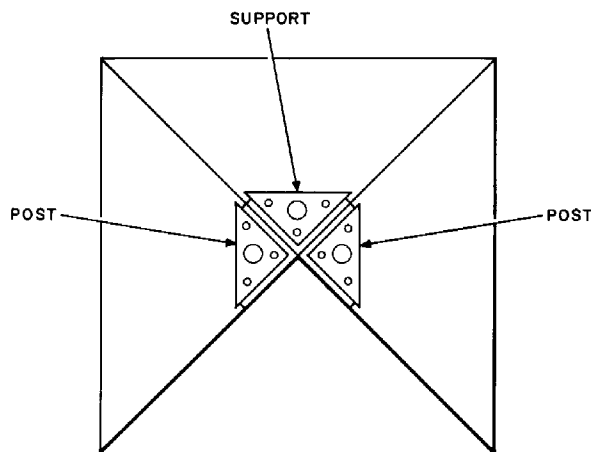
KS-19426 Mounting on Flat Surface, Using List 5 Support
